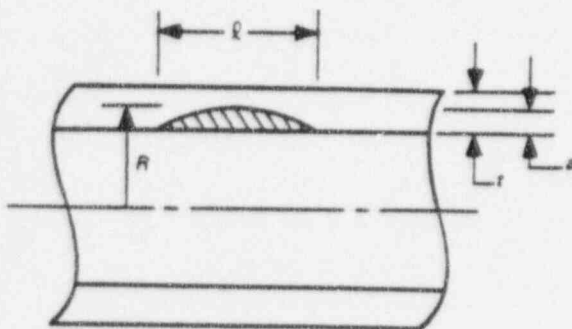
AXIAL FLAW GEOMETRY
